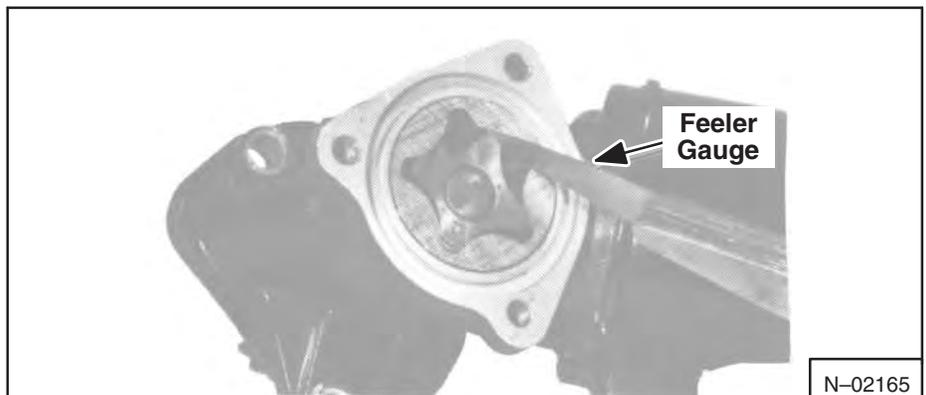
B-40 Checking The Outer Race To Housing Clearance
